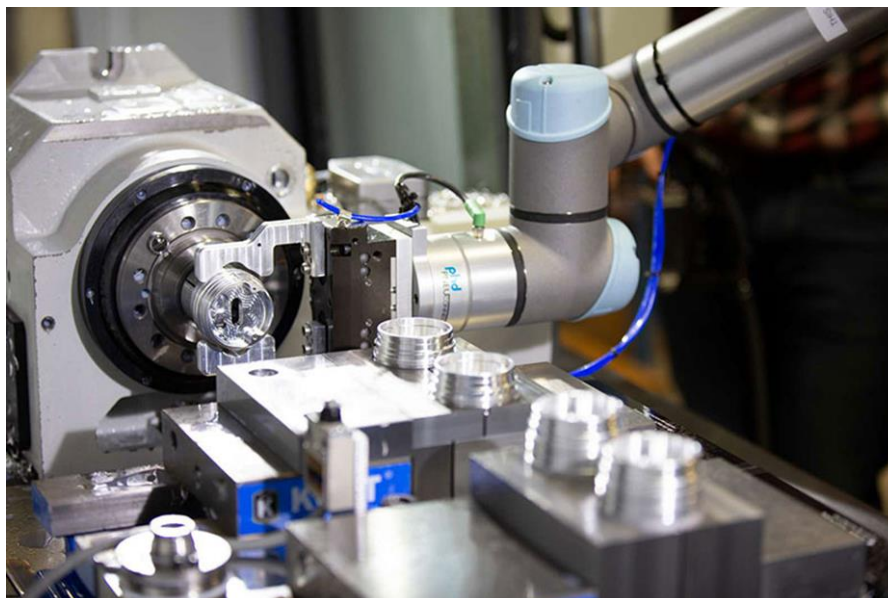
A CNC machine tending with cobot using a mechanical gripper
